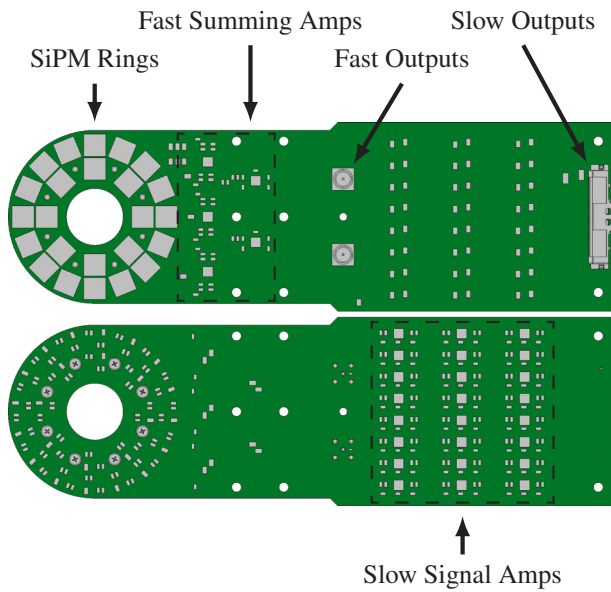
Design of the PCB used for the particle detector array highlighting the key components.
